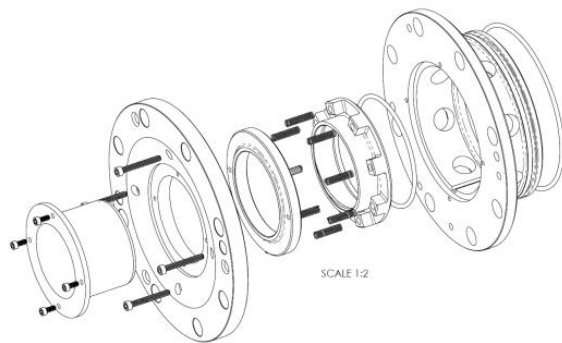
Expanded view of Flexware® cartridge sleeve seal.
